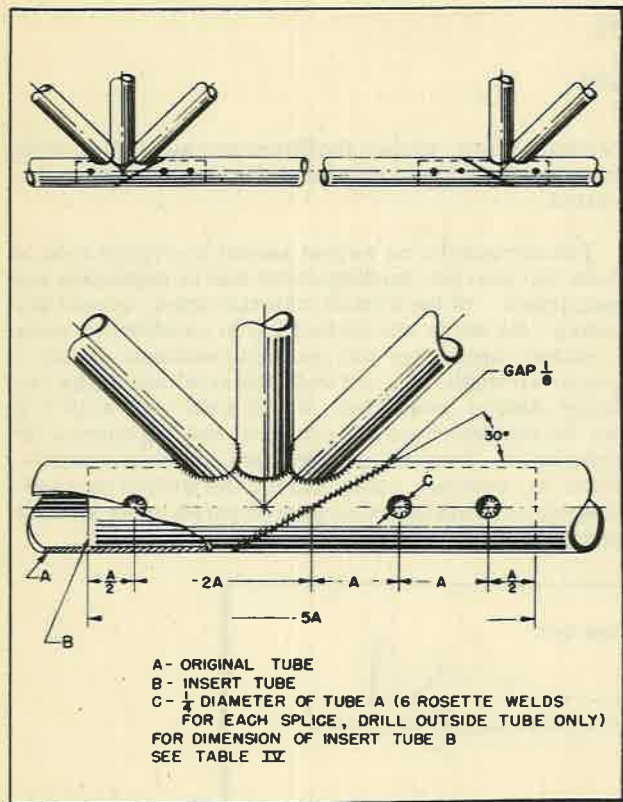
Tube Splice Using Same Diameter Replacement Tube
